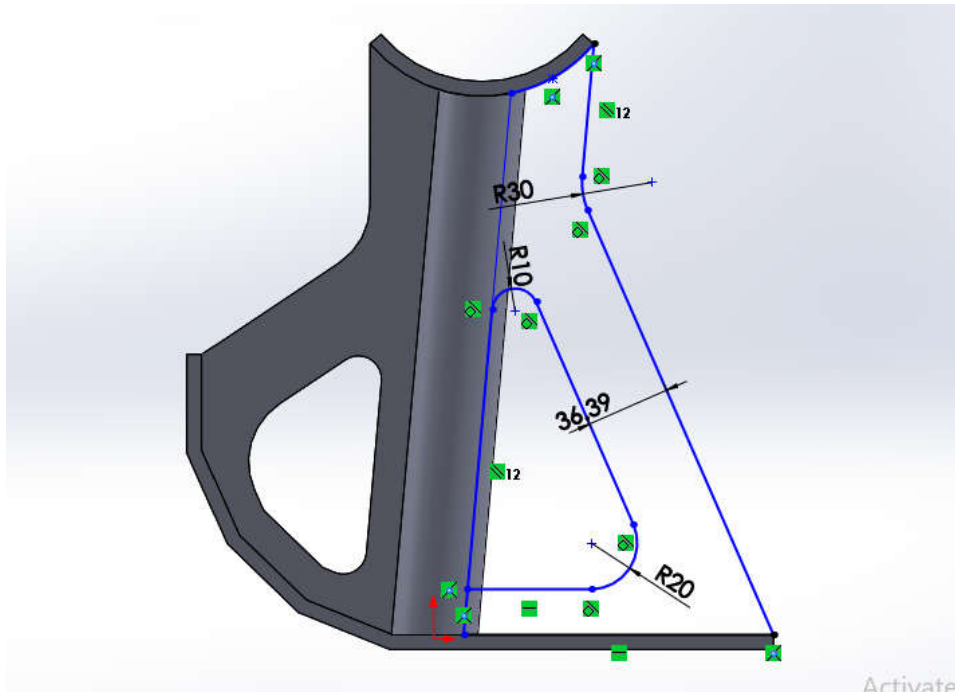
Sketch of stiffener supporting the flat base plate and the Axle holder
